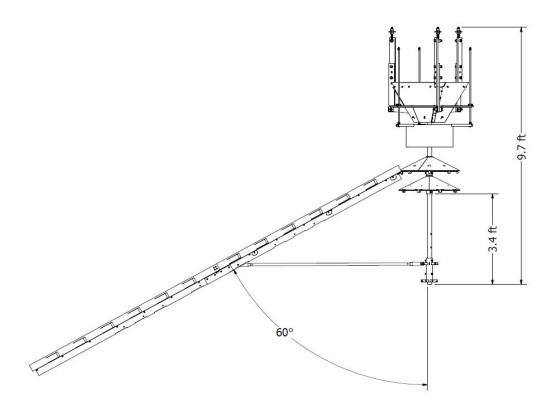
Sectional Dimension of 45K Grain Spreader
